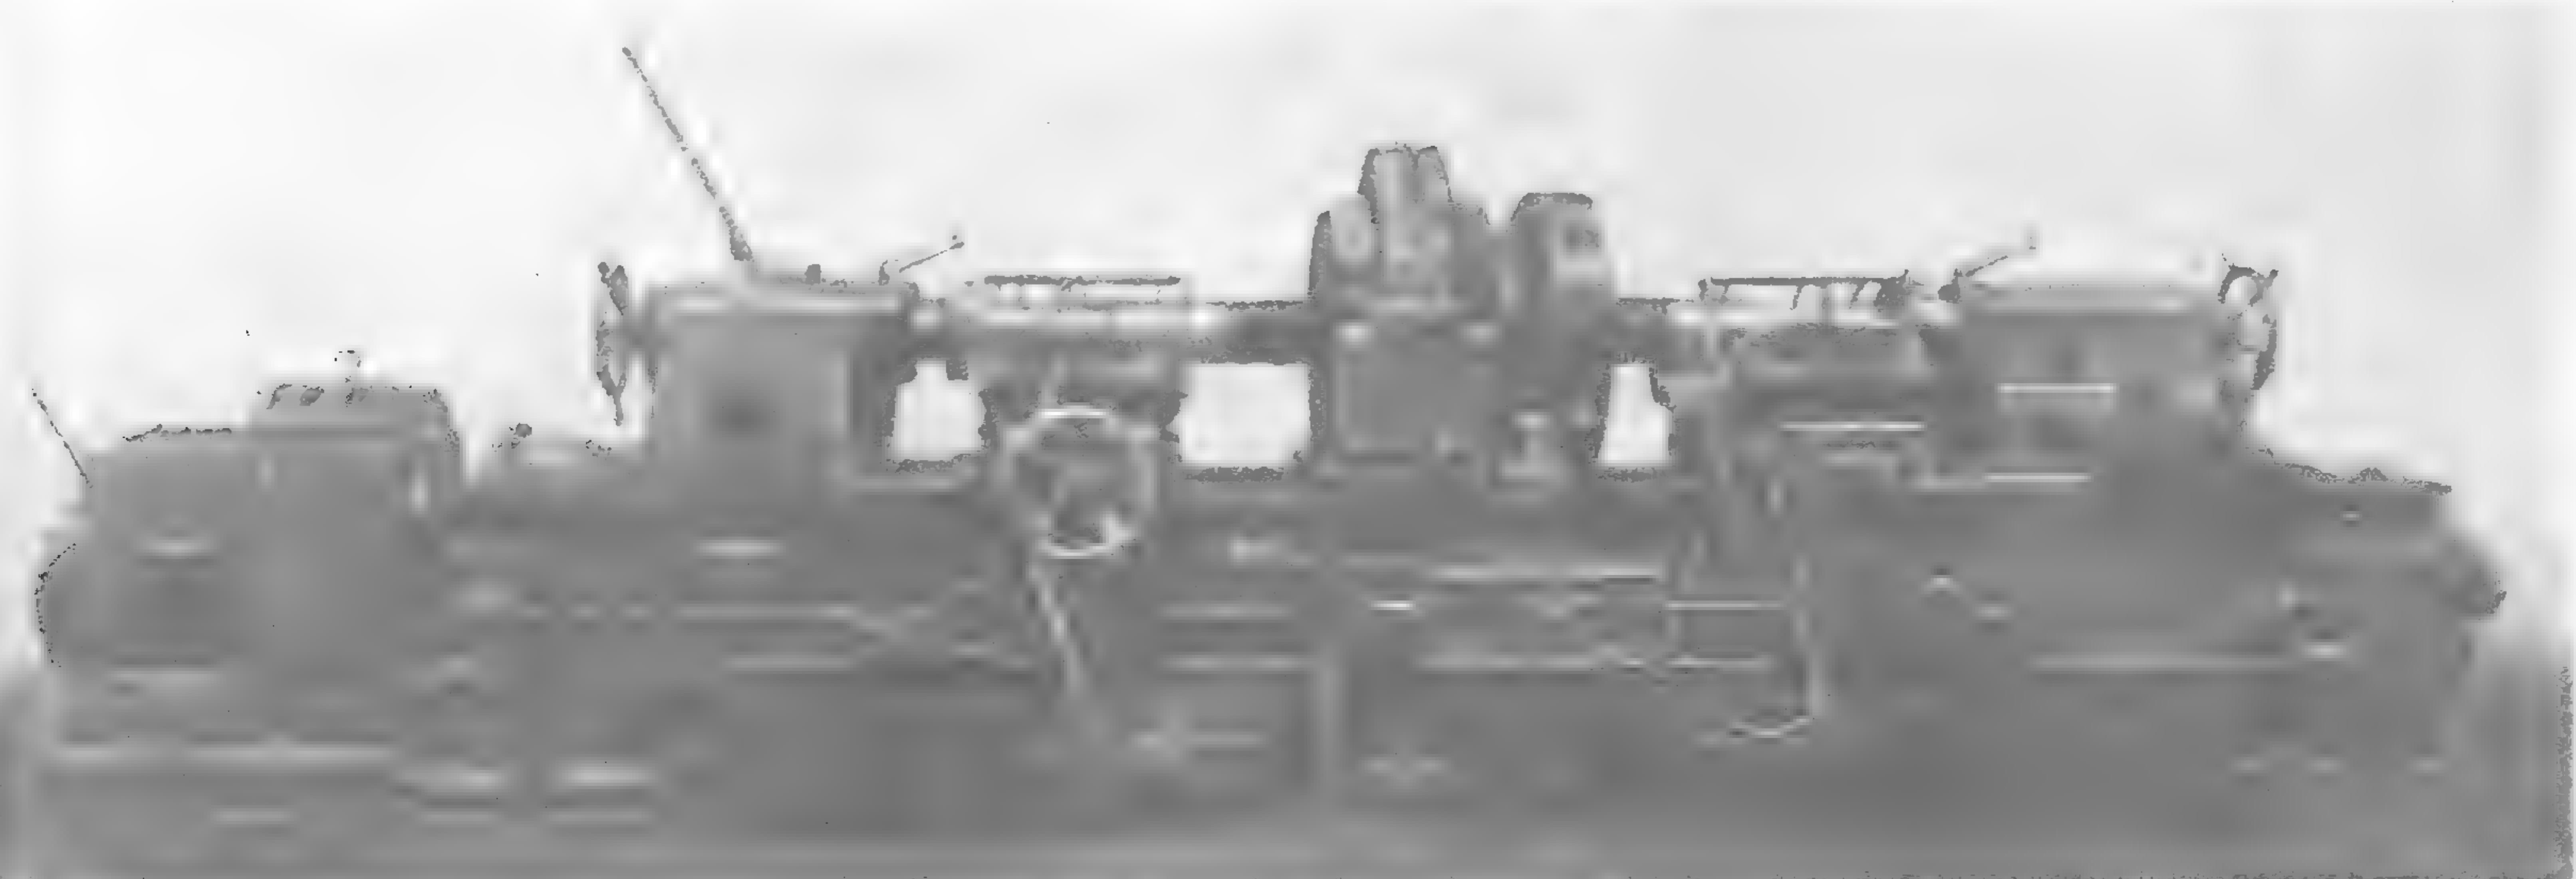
Axe Roughing Lathe with 60 h.p. Motor
